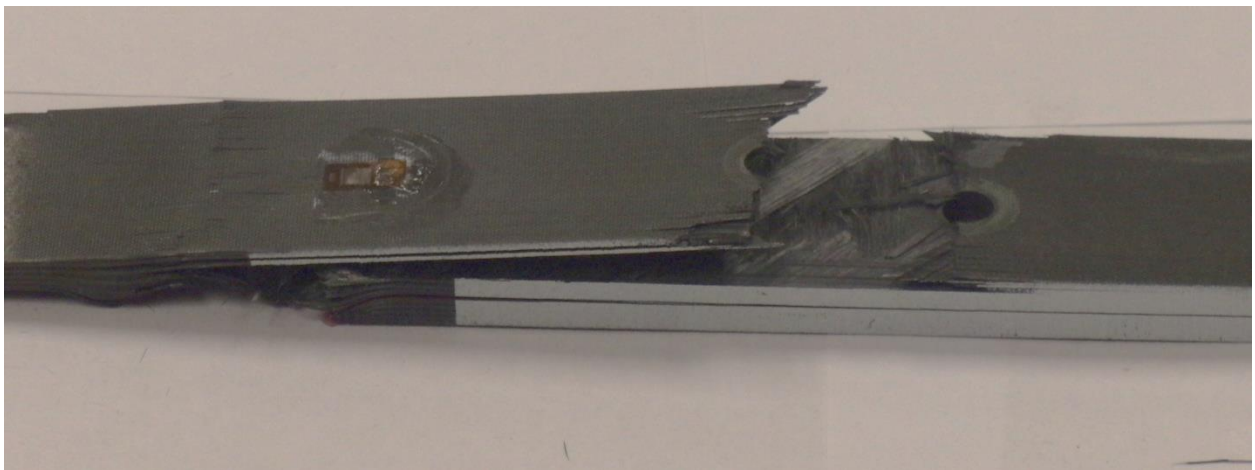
Specimen ultimate failure—filled-hole tension mixed with laminate delamination/splitting [3]
